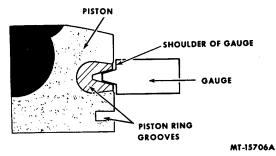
Checking Top (Keystone) Ring Groove Wear
